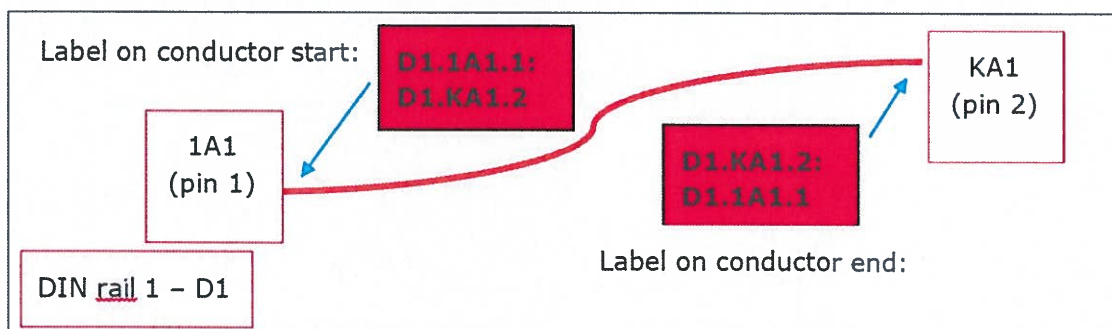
General scheme of printed labels from the printing machine Weidmüller
